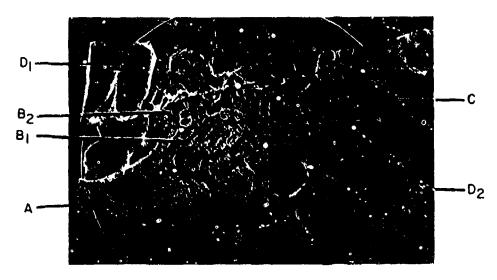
Fatigue fracture surface of a hydrogen-embrittled A-514 weldment containing porosity, 8x.
